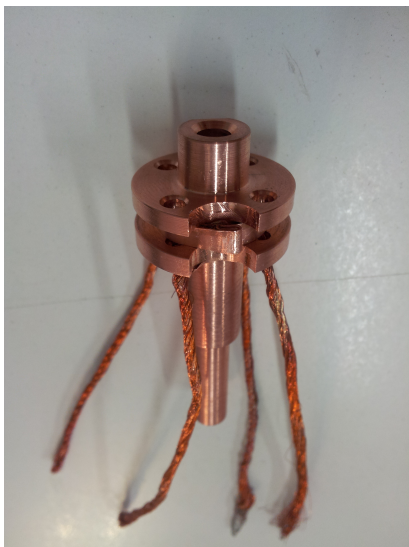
New pre-holder designed during this thesis, to replace original one from *Cryovac*. This sample pre-holder does not need soldering of the braids, reducing the risk of getting broken after many rotation cycles due to copper brittling after heating for welding.
